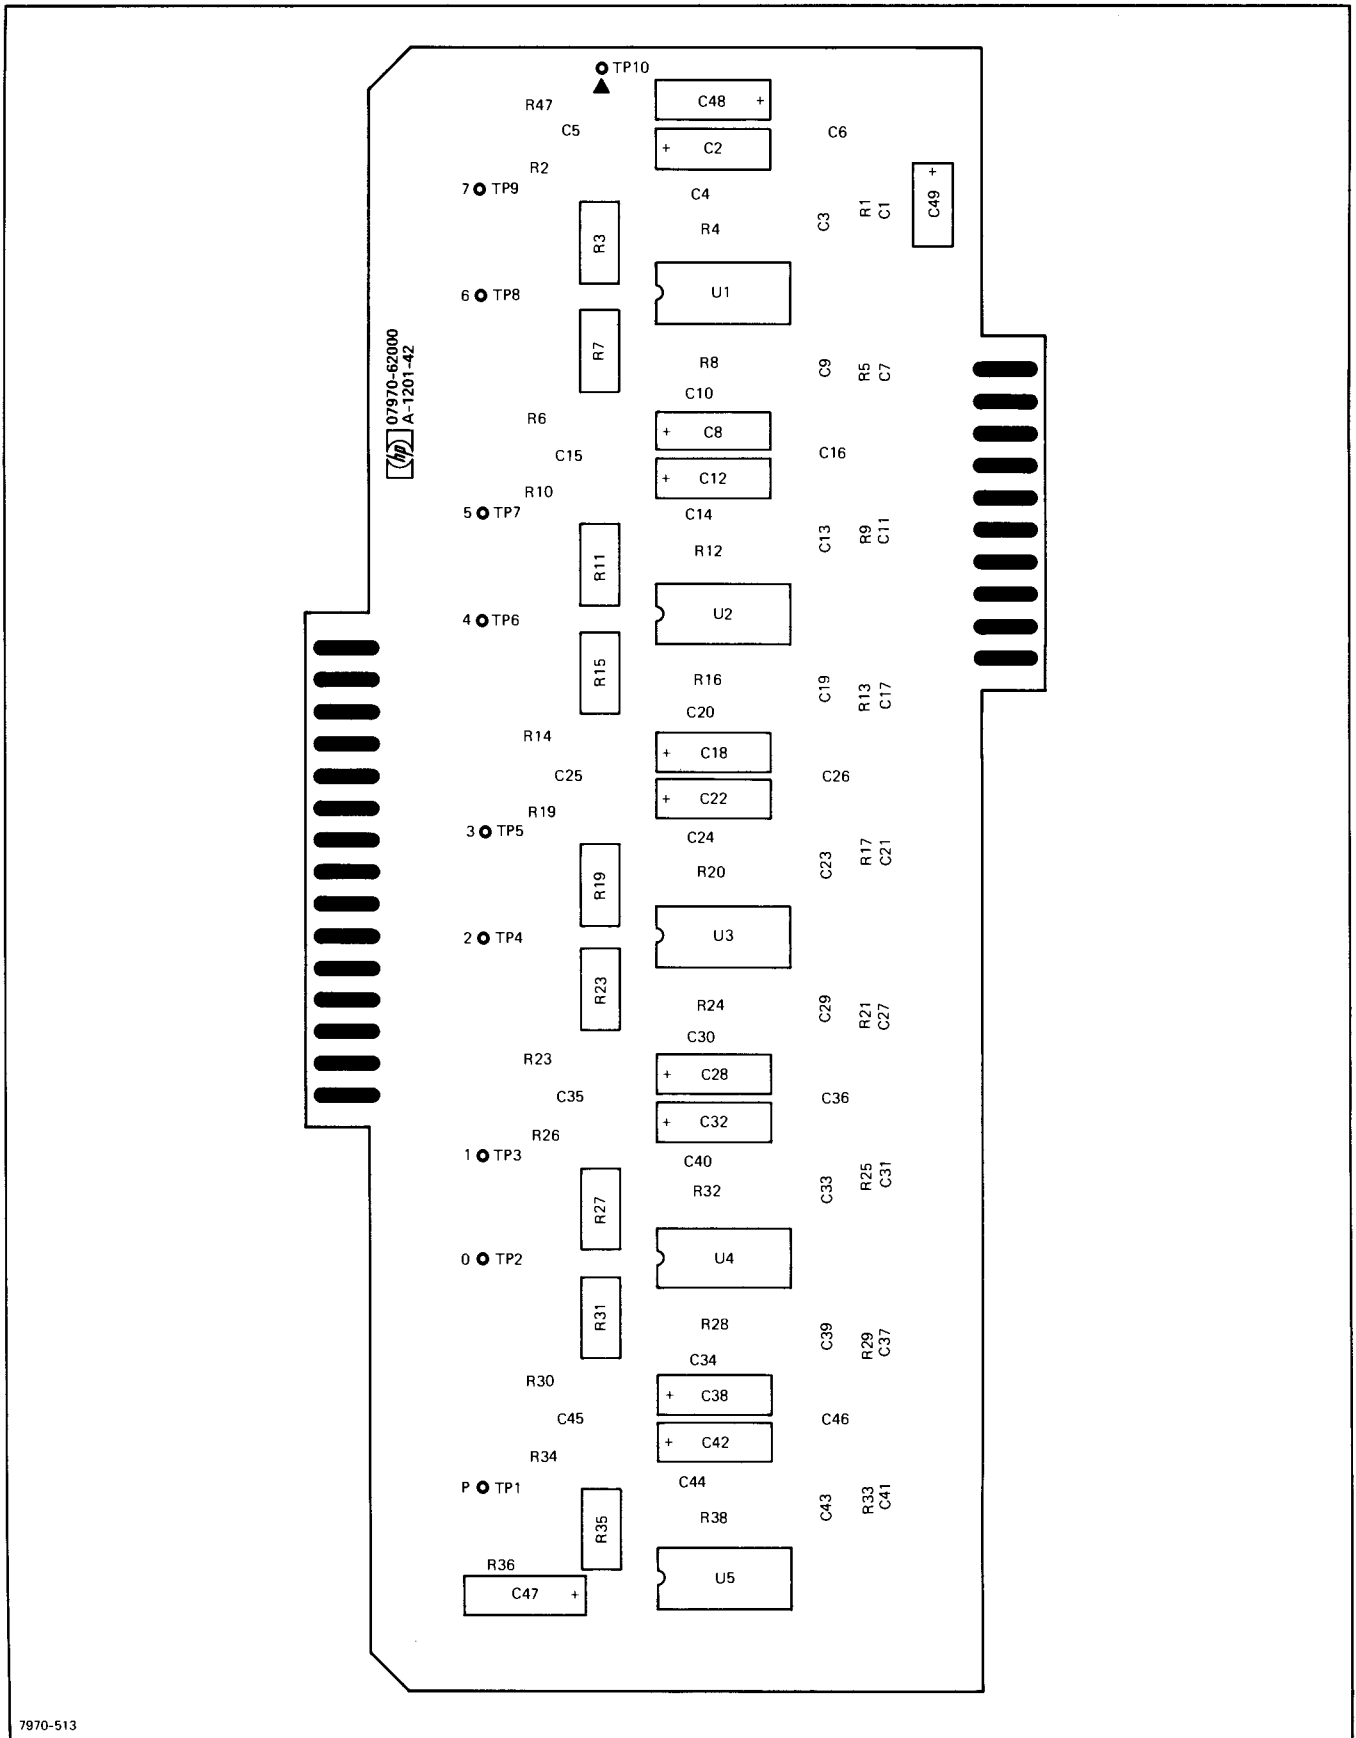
Read Preamplifier PC Assembly A15, Parts Location Diagram
